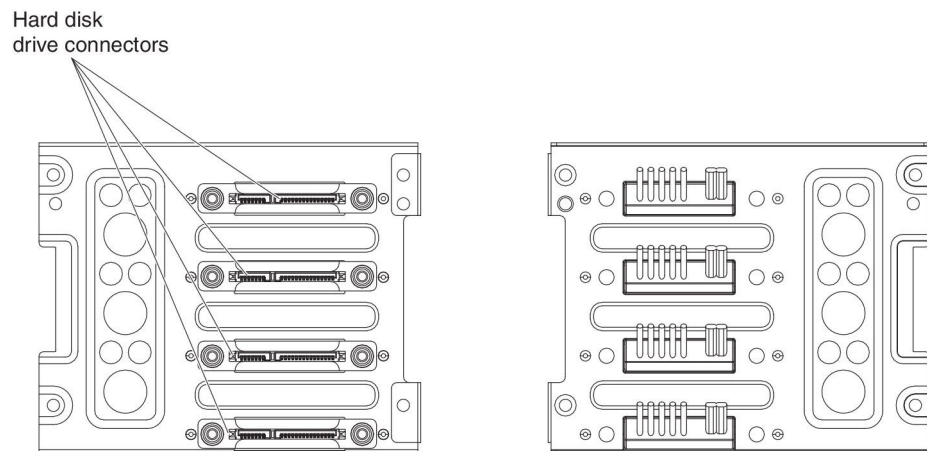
Connectors on the 3.5-inch hard disk drive backplate assembly
